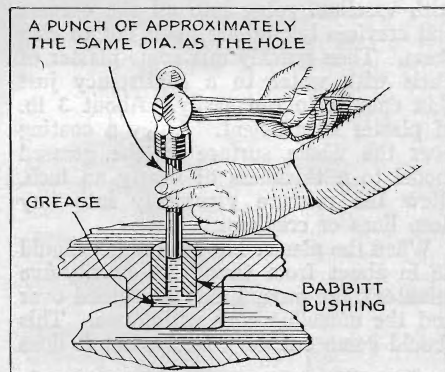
By filling with grease and using bolt, bushing in blind hole can be removed.
